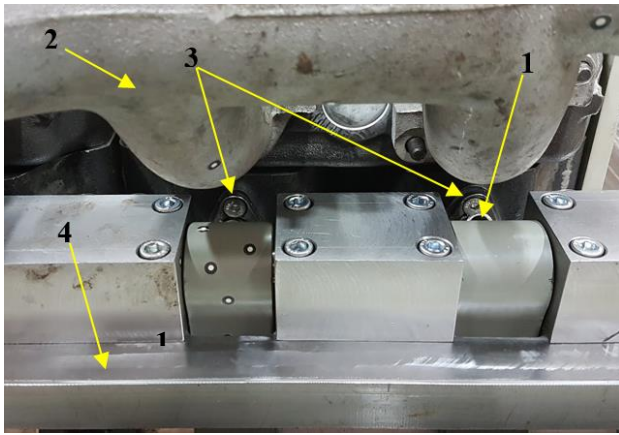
Modified coolant outlet from the cylinder block (side view): 1 – outlet pipes; 2 – engine intake manifold; 3 – flanges; 4 – support plate
